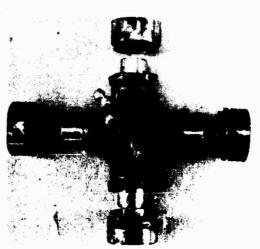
Broken Left Rear-Wheel Drive-Shaft Outboard Universal-Joint Cross On M151A1C after 4189 Test Miles.
